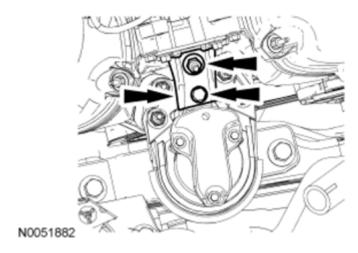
Locating Engine Mount Brace Nut And Bolt Courtesy of FORD MOTOR CO.
